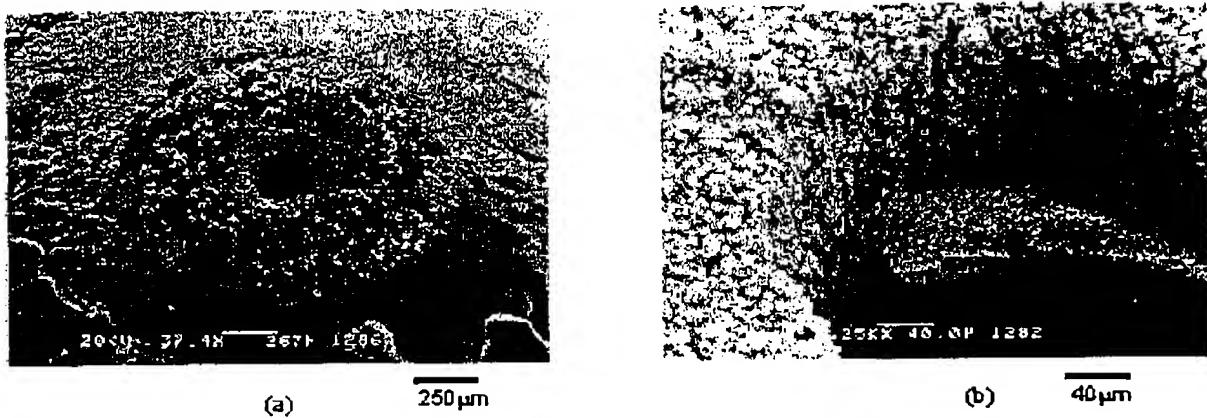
Photographs of nozzle surface and nozzle hole at 8 h
